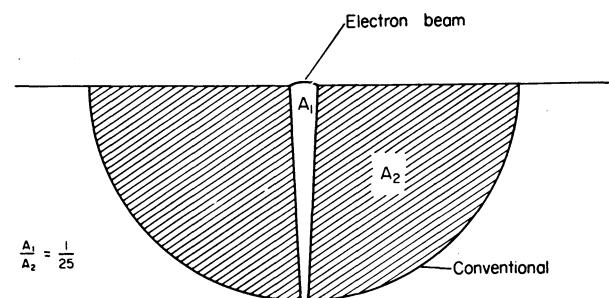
Comparison of fusion zones; (A_1) produced by electron beam welding; (A_2) produced by conventional welding. Reproduced from Meier⁸⁵⁶ (Courtesy of Pergamon Press)
